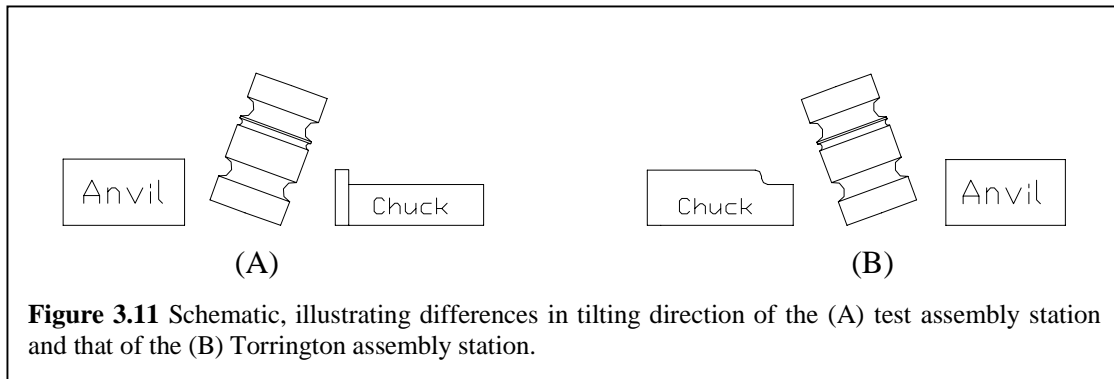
Schematic, illustrating differences in tilting direction of the (A) test assembly station and that of the (B) Torrington assembly station.
